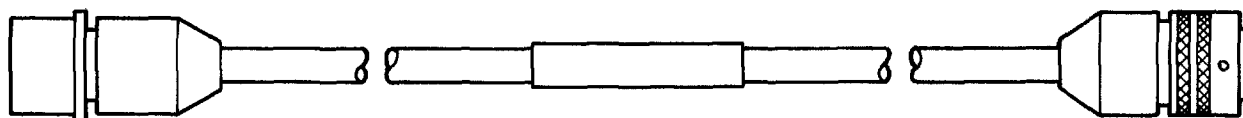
Adapter Cable Test Set (Sheet 3 of 4)
